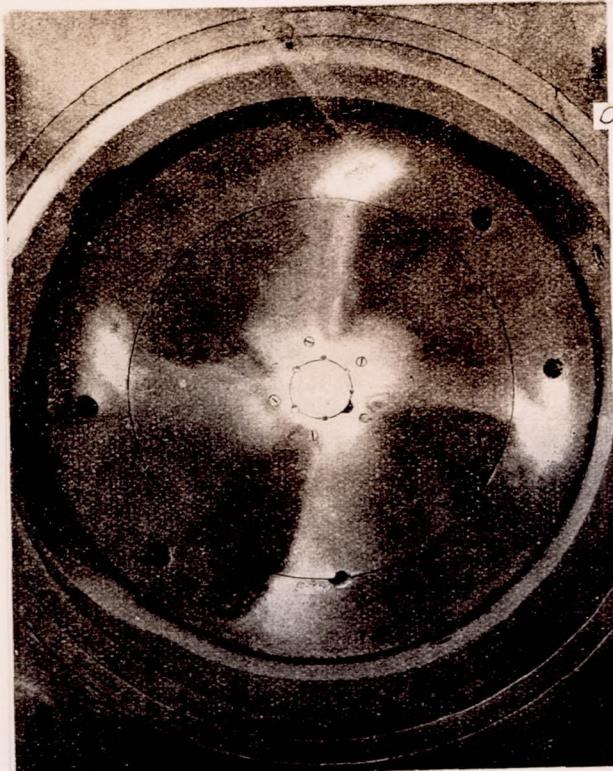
Mushroom piston head of Krupp Diesel engine.
